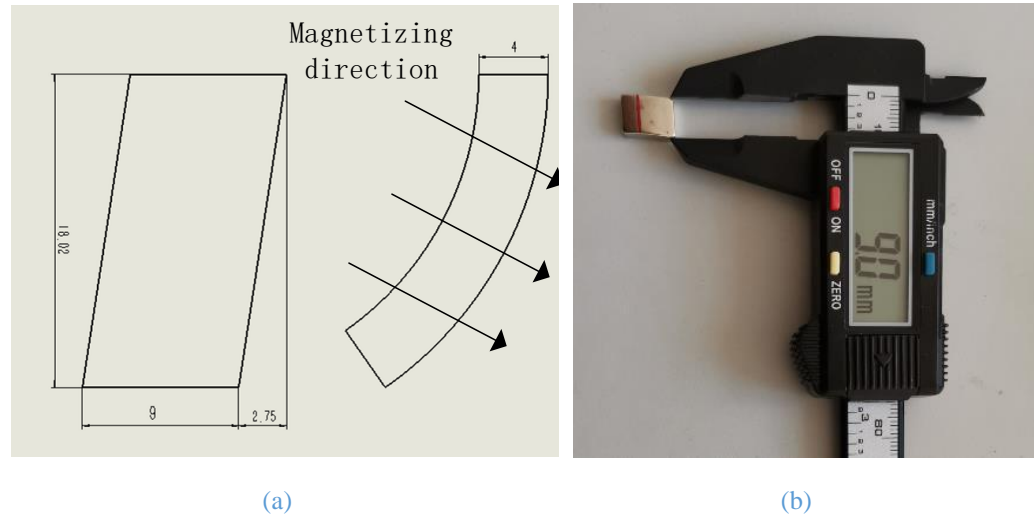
Magnetic screw PM (a) Mechanical drawing and magnetising direction (b) Physical map
